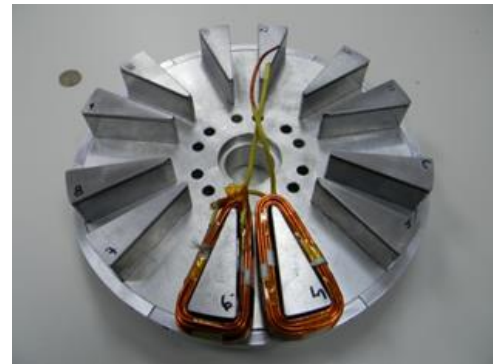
Stator showing the inserted pole pieces and the disposition of two adjacent coils
